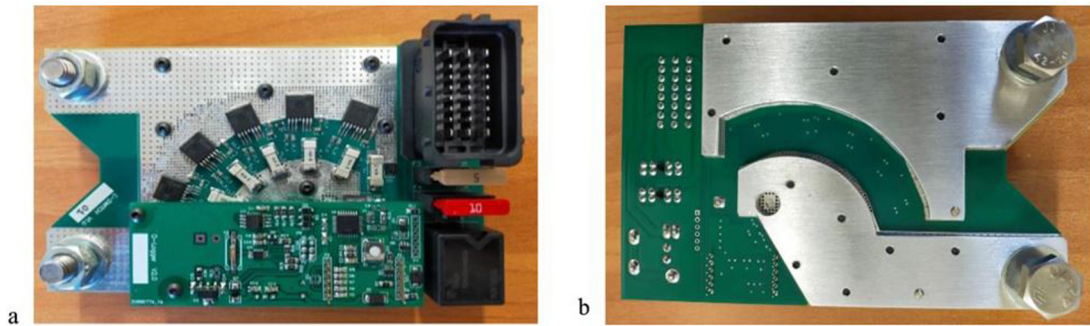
(a) Top and (b) bottom view of the realized PCB.
